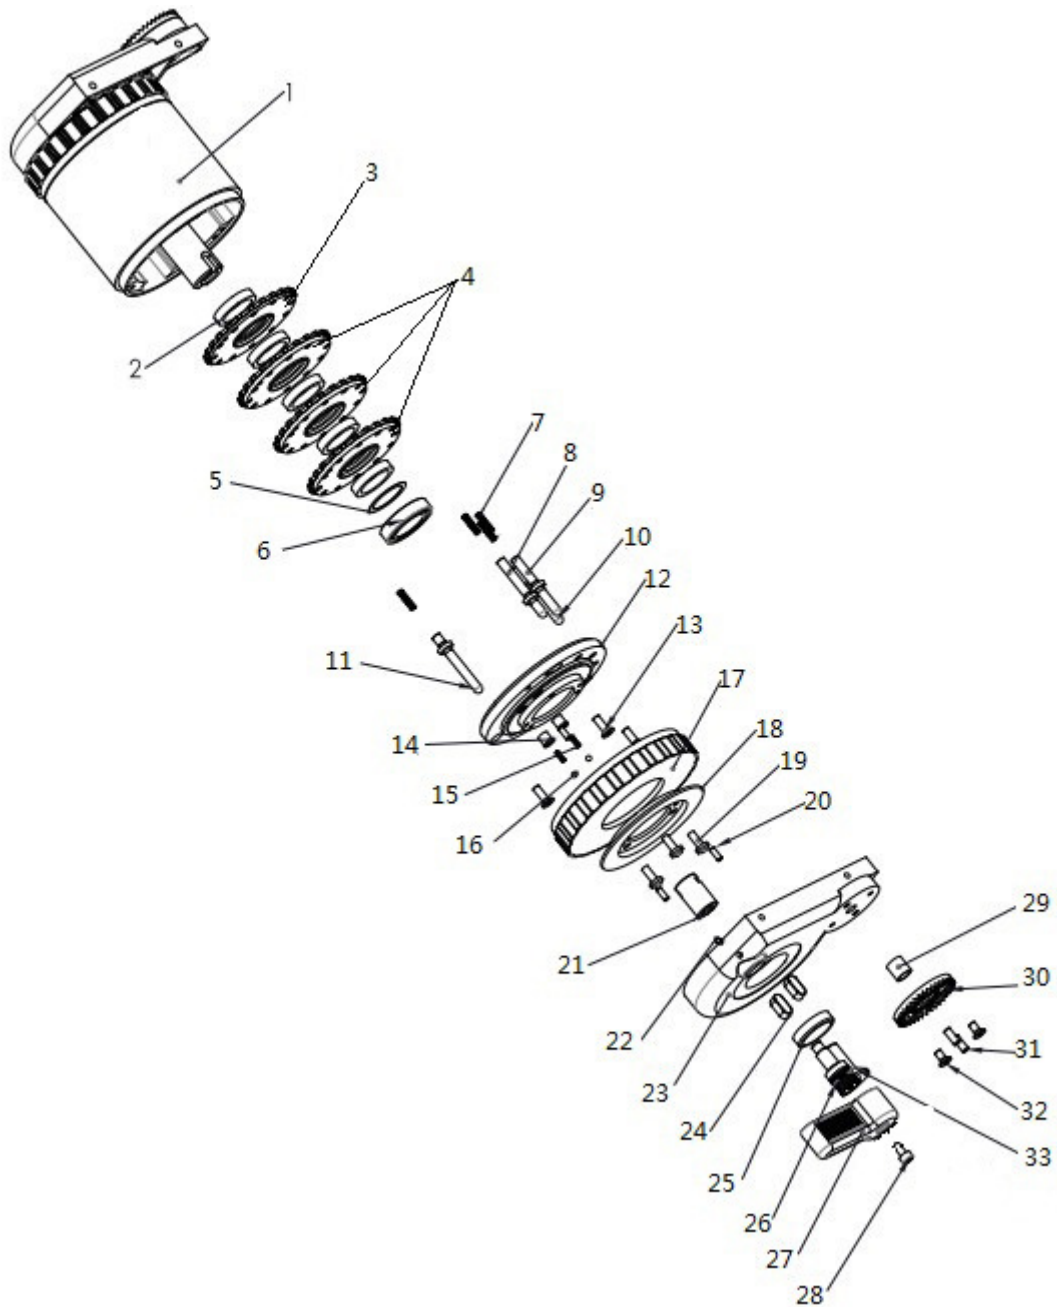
REACH PLUS 5 Fluid Head —Tilt Brake and Drag Unit Assembly
